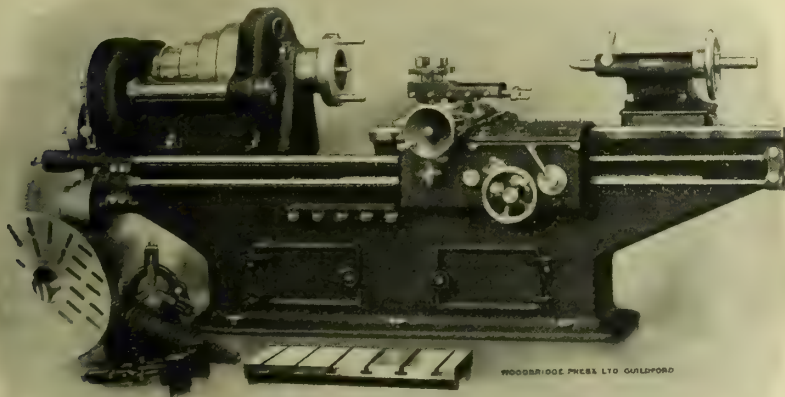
"COLONIAL" TYPE, 9IN. CENTRE LATHE. MESSRS. DRUMMOND BROS., LTD.
